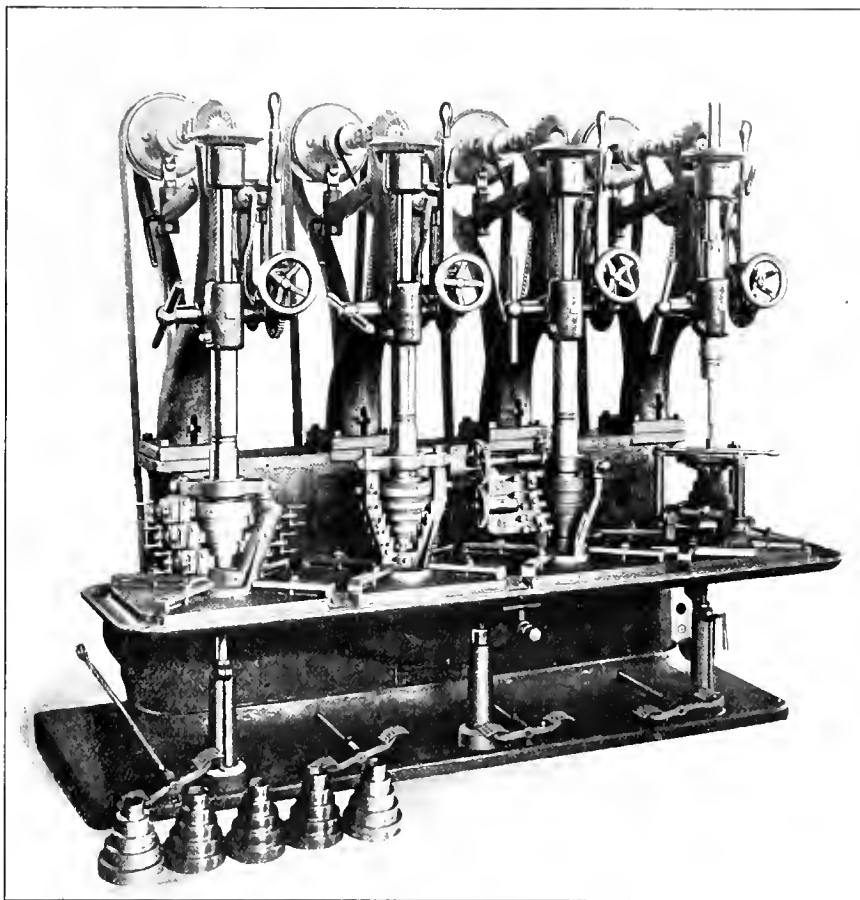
Set of Tools used on Gang Drill for Boring and Turning Cone Pulleys.
